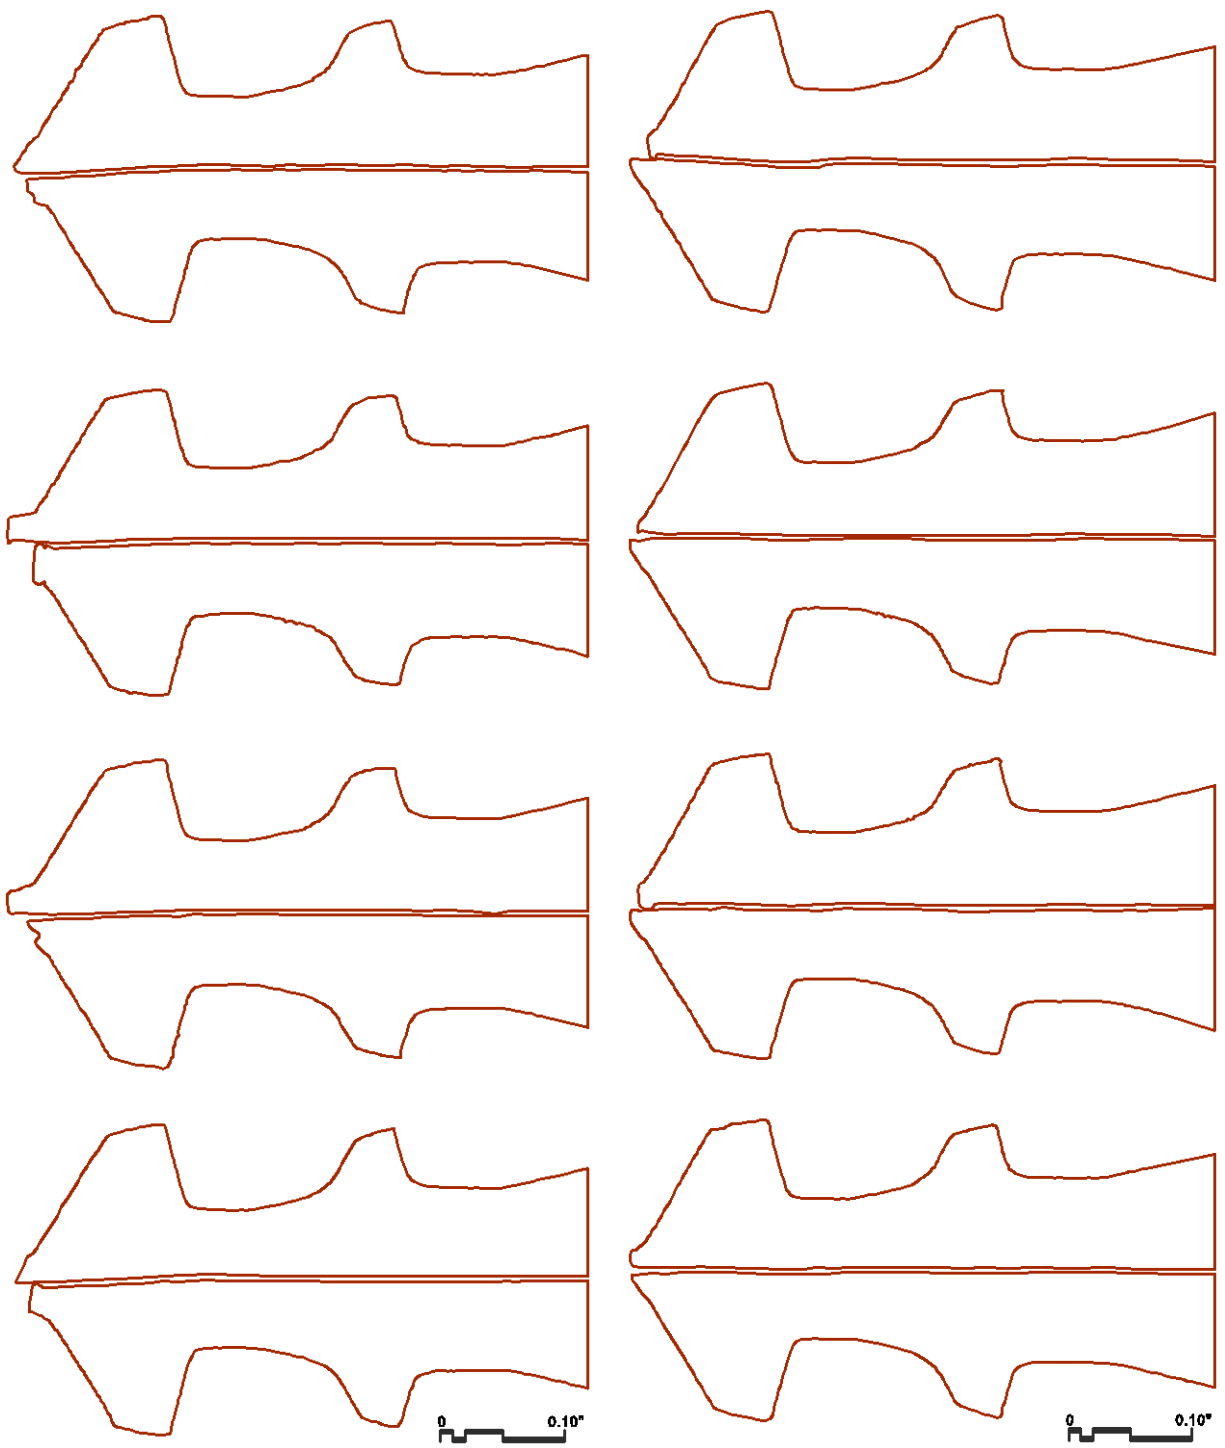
As-Built 0.104 in. Tube-C Coined Pressed-End CAD Generation - Step 4
